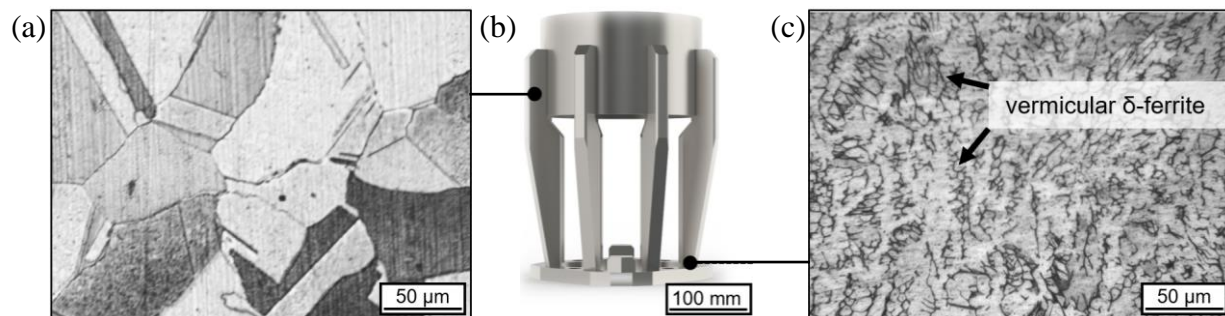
Microstructure of the base material, austenitic stainless steel AISI 347 (a), CAD draw of a control rod guide tube (b) and microstructure of the the welded material ER 347 (c)
